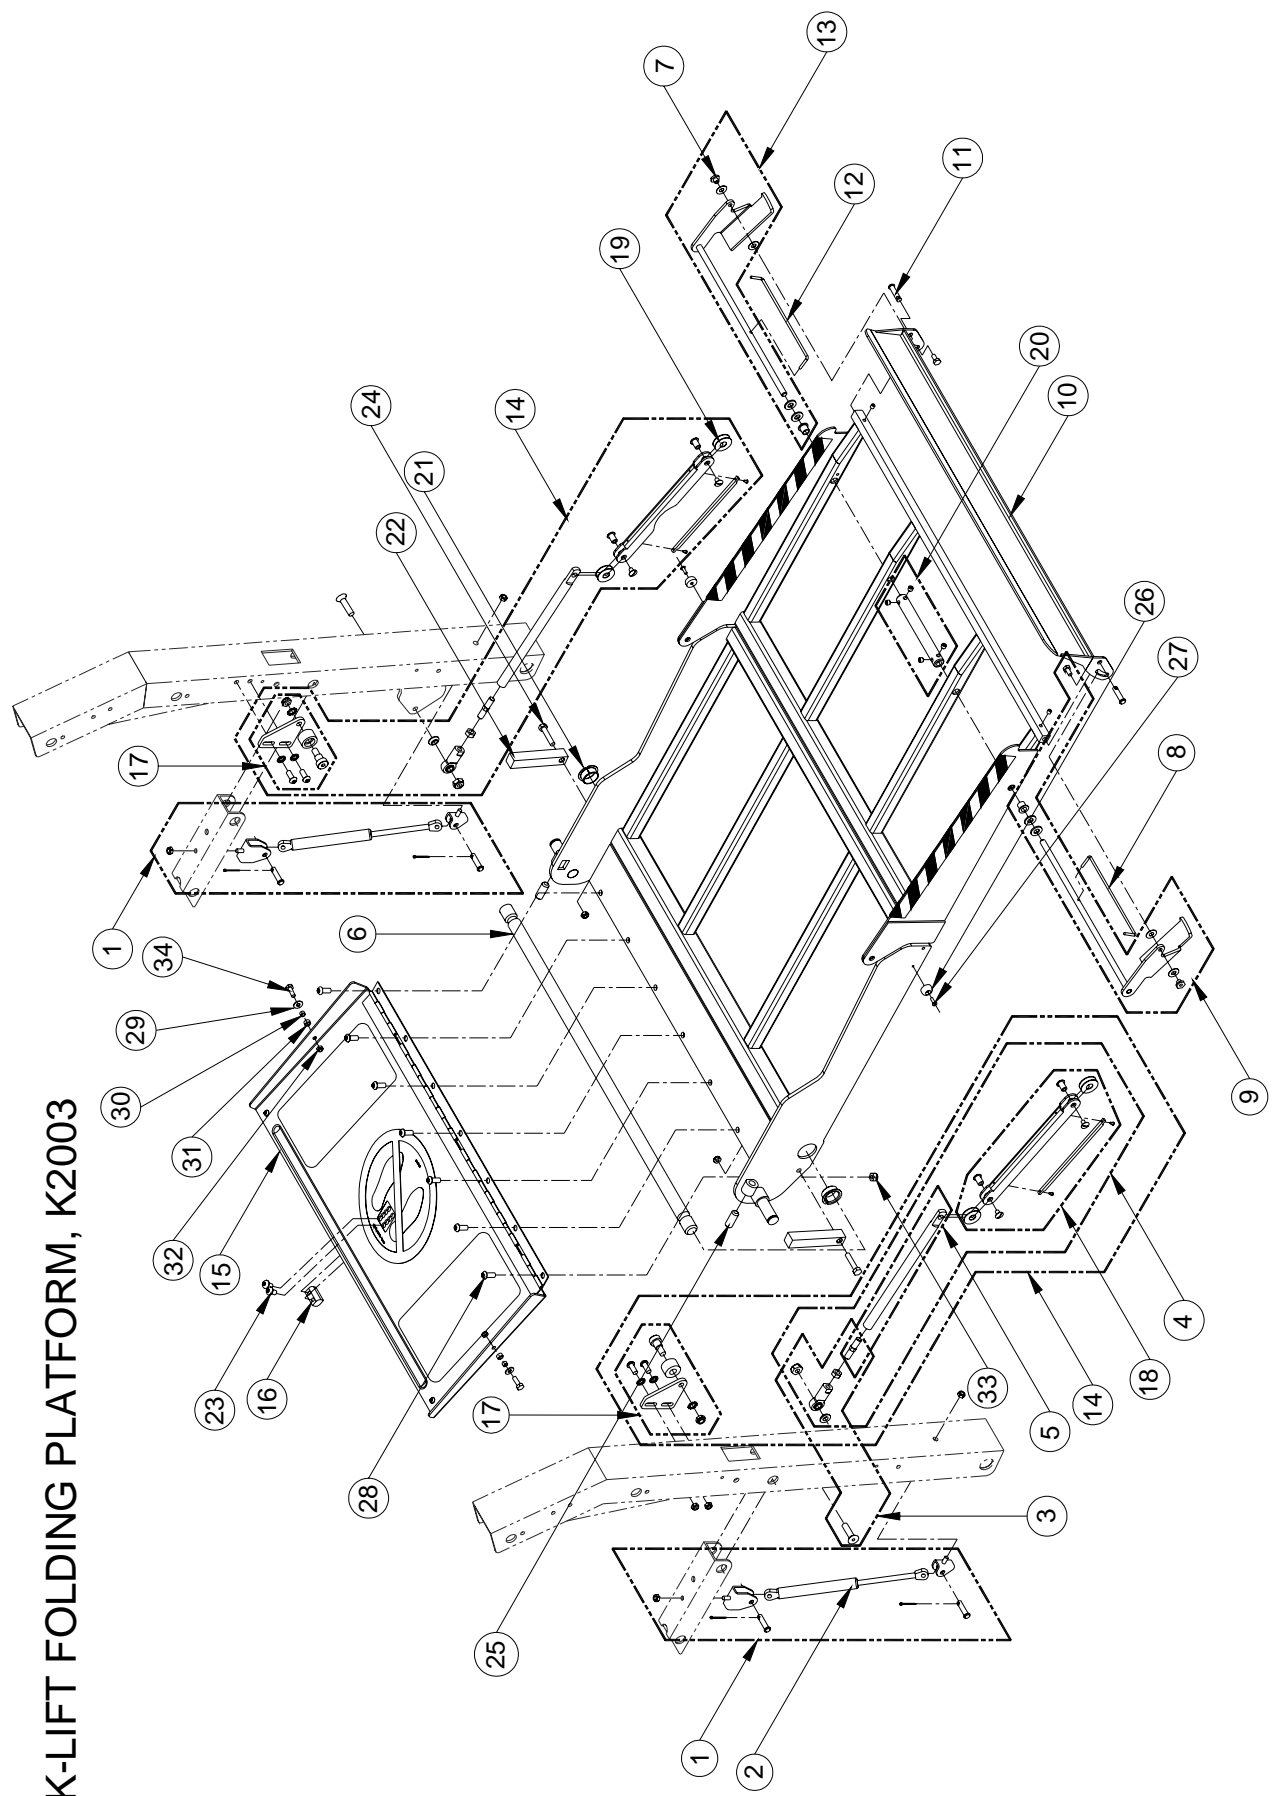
FOLDING PLATFORM ASSEMBLY, K2003
